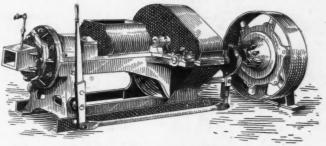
AMERICAN AUGER MACHINE FOR MAKING STEMMING
